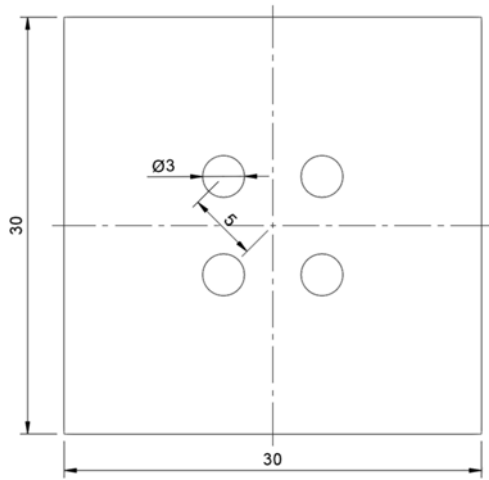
Dimensions of the designed pressductor sensor in millimeters
